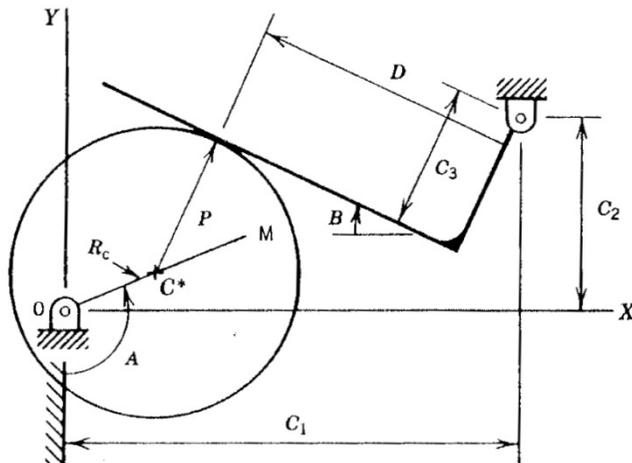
Full Circle Eccentric Cam with Oscillating Flat-faced Follower
